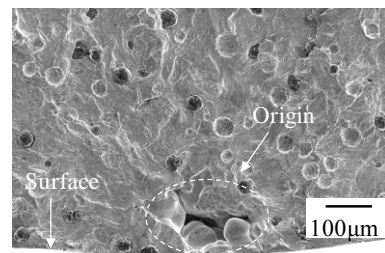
Typical fracture surface image (FCD800,  $N_f=1.6 \times 10^5$ ).
